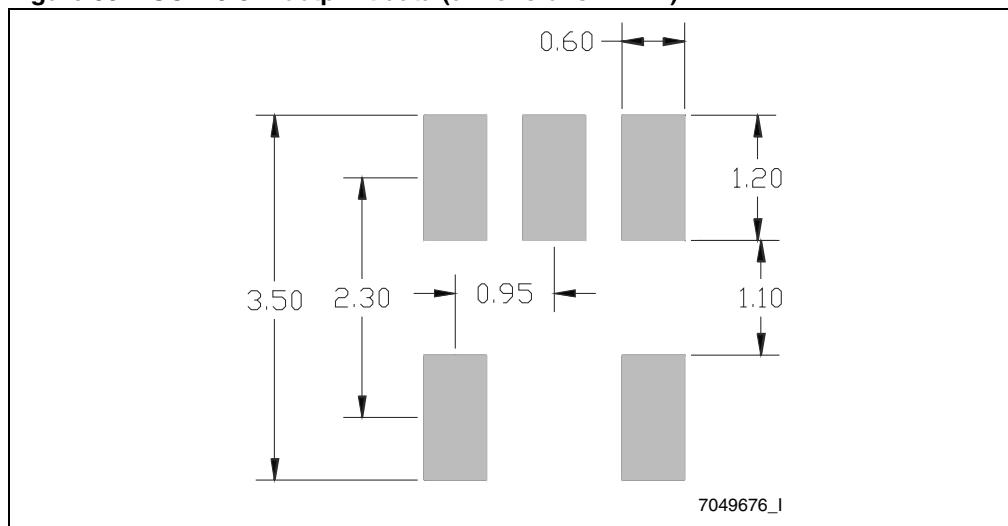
SOT23-5L drawingFigure 36. SOT23-5L footprint data (dimensions in mm)
